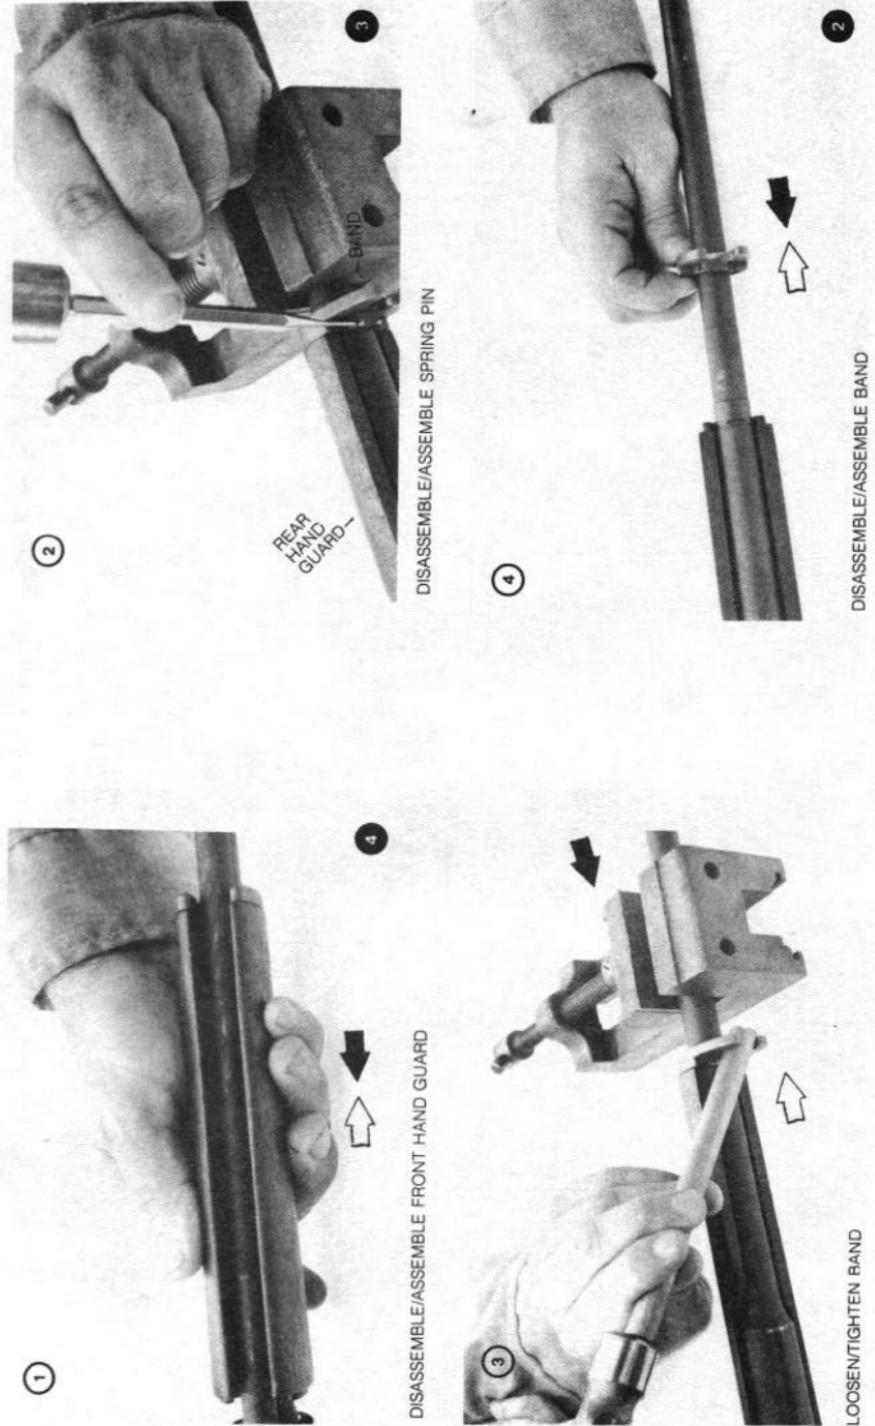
Disassembly / assembly of handguard group (1 of 2).
